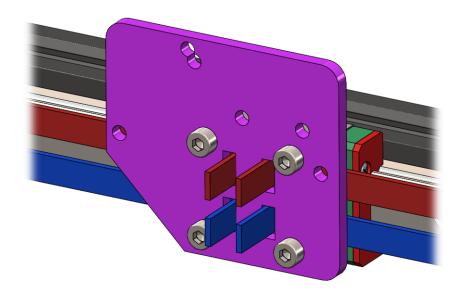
Secure belts using P10 bracket, adjust M3x8 Screws
